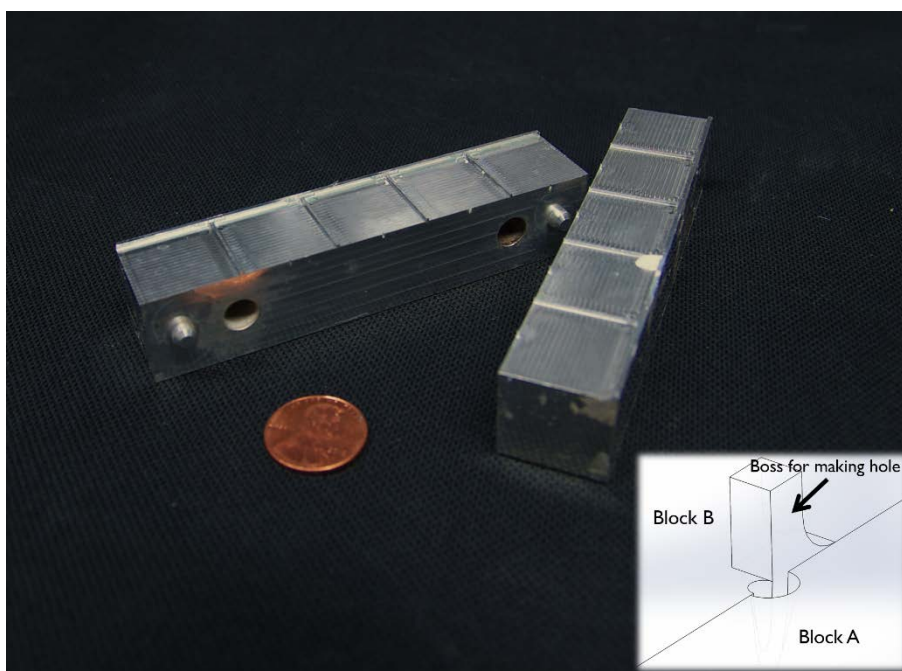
Image of in-house aluminium alloy mold core for micro-needle molding.
